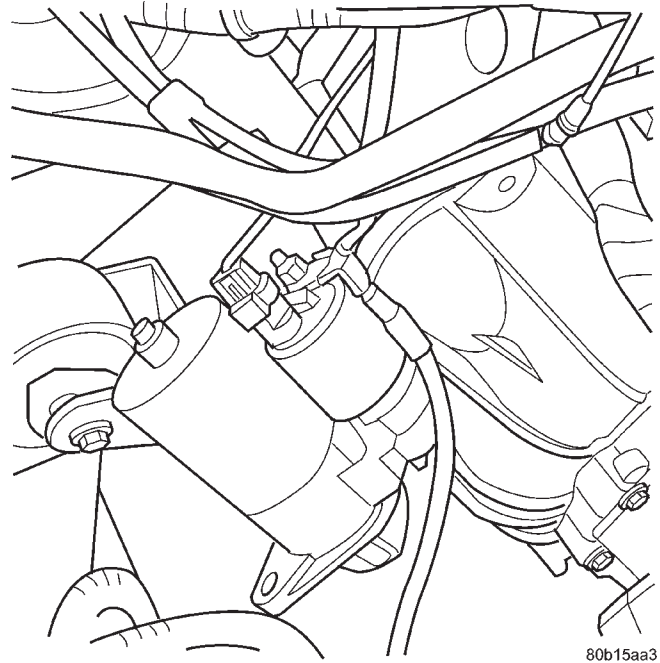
STARTER REMOVAL - 4 CYLINDER
